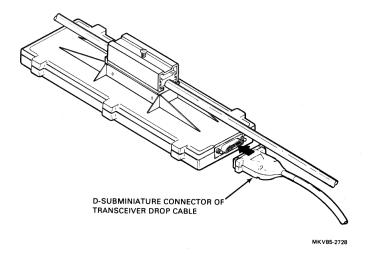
Ethernet H4000 Transceiver with Removable Tap Assembly
